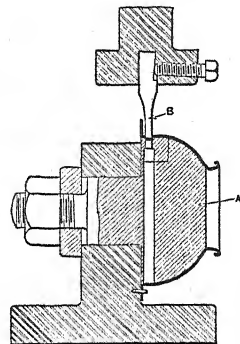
Die for Punching Two Small Holes in the Body Close to the Flange.
